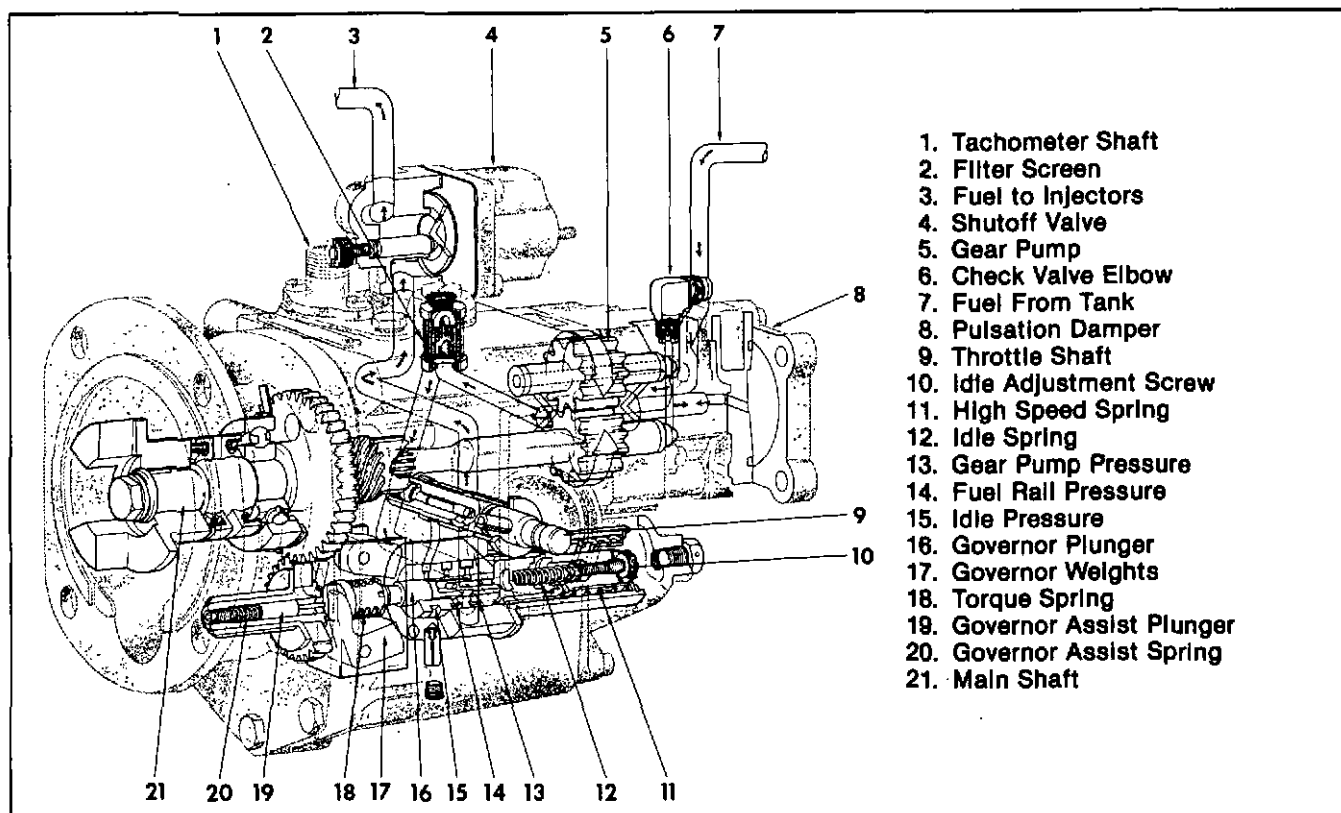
, (FWC-31). PT (type G) fuel pump cross-section and fuel flow.
